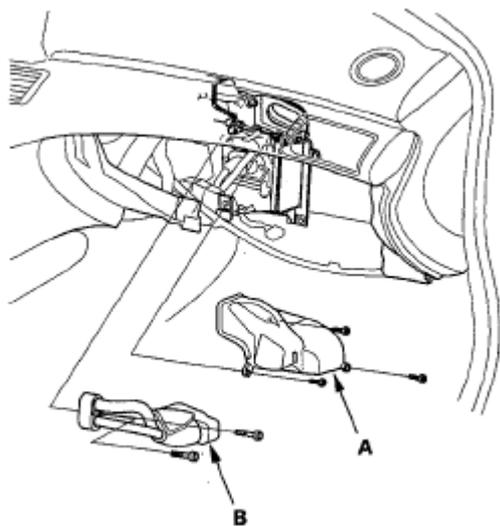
Identifying Expansion Valve Cover, Bolts And Pipe
